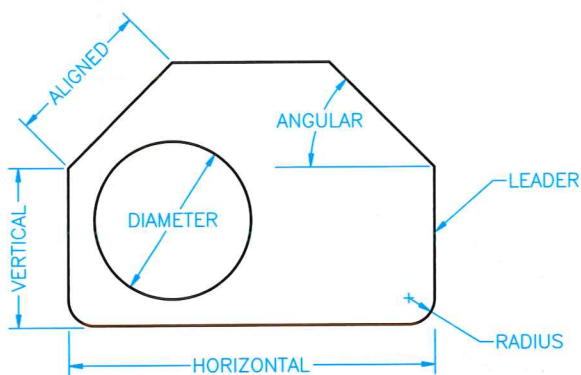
Common types of dimensions that appear on a CAD drawing.
